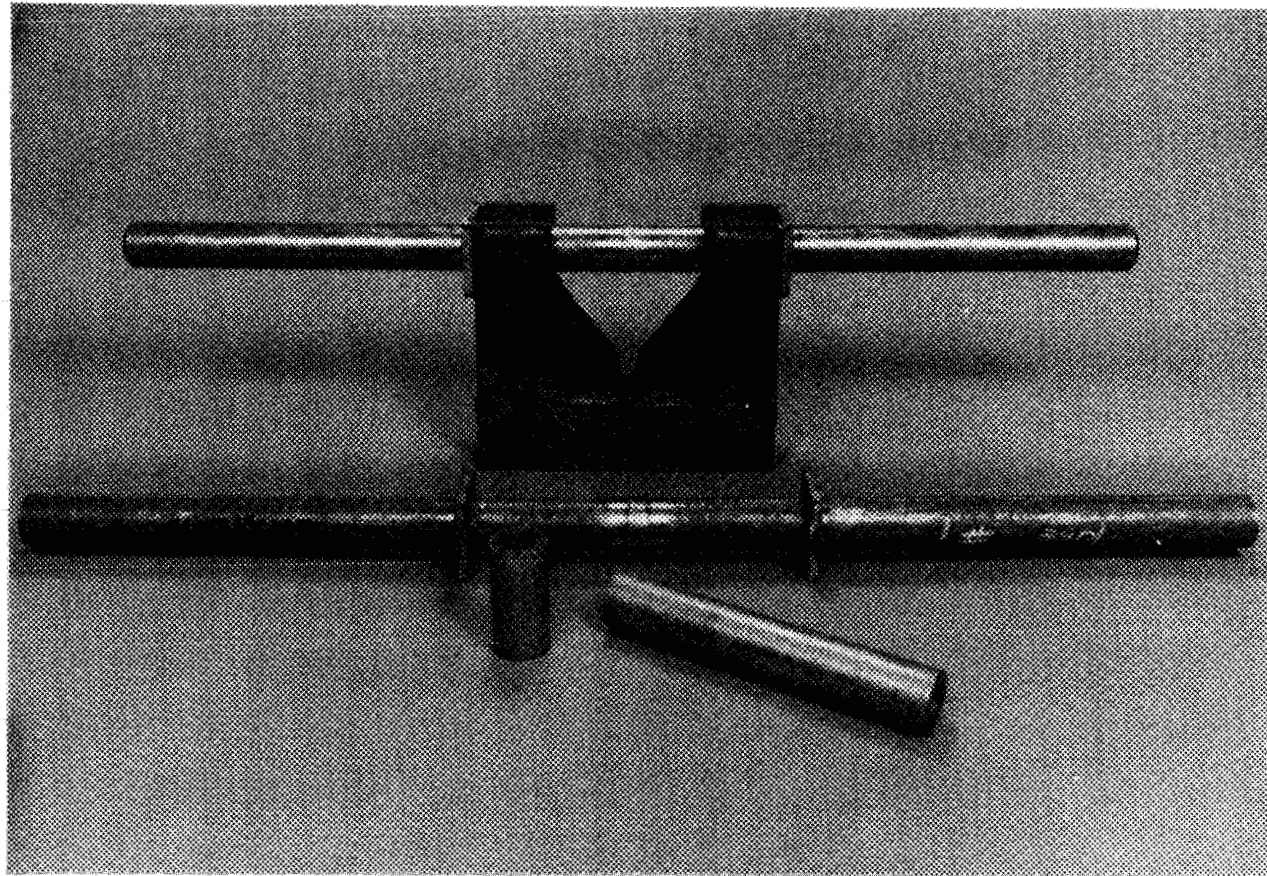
Photograph of the restraint fixture used in producing gas tungsten arc weld in HT-UPS tubing.
